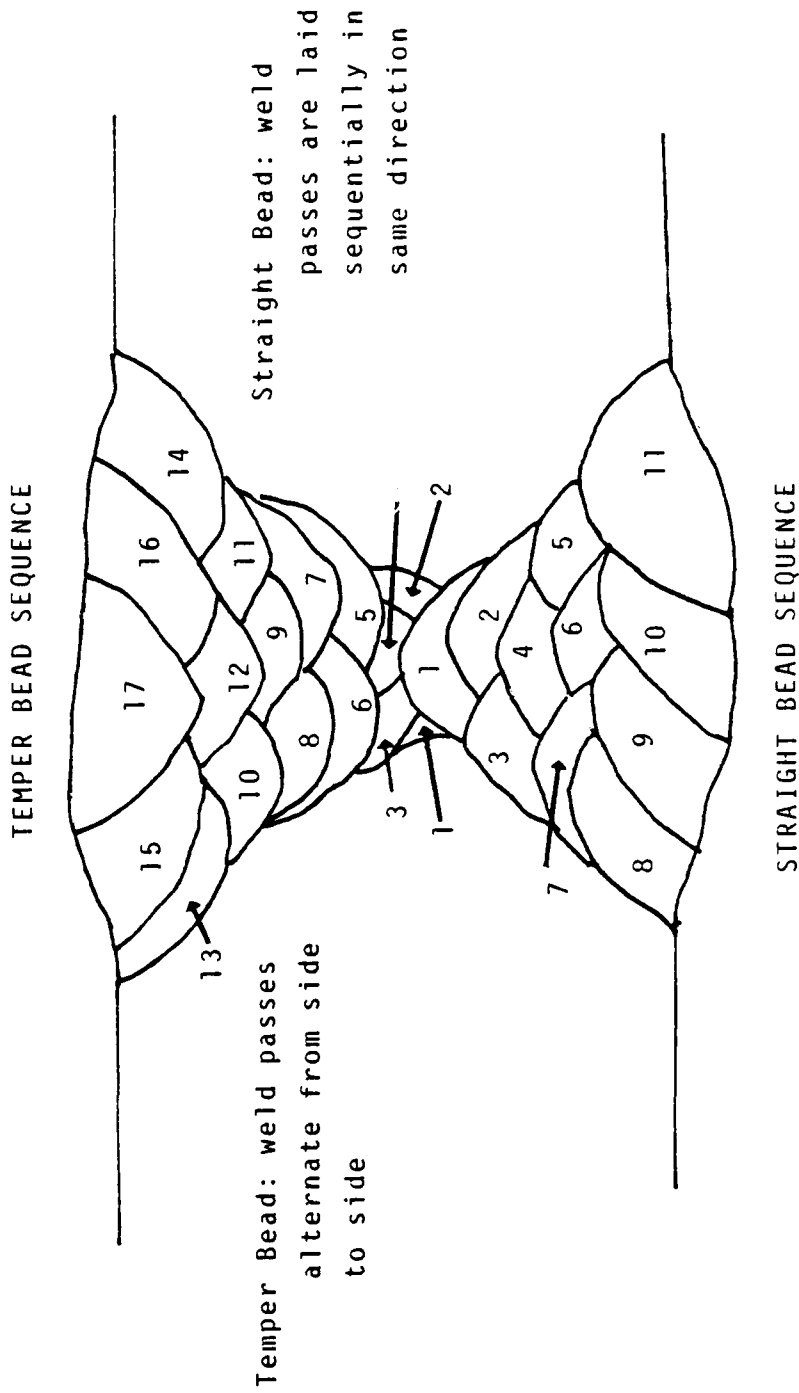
Illustration of temper bead and straight bead welding schemes
